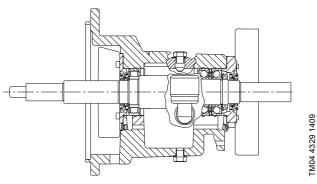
Bearing bracket with oil-lubricated roller and double angular contact bearings
